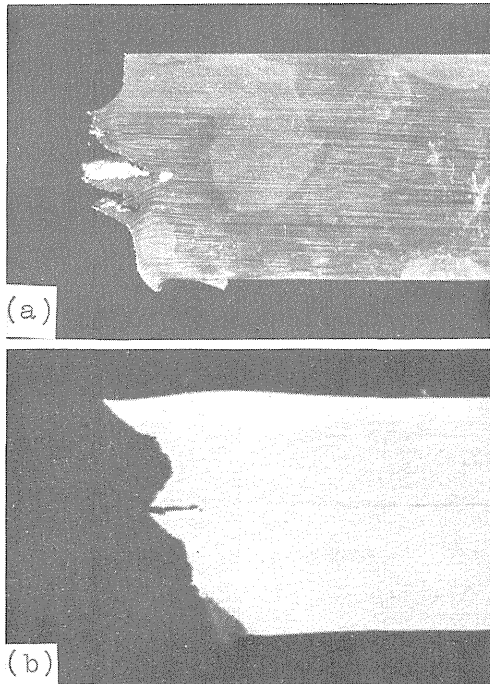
Fracture profiles of modified-annealed specimens (steel SNC2)
